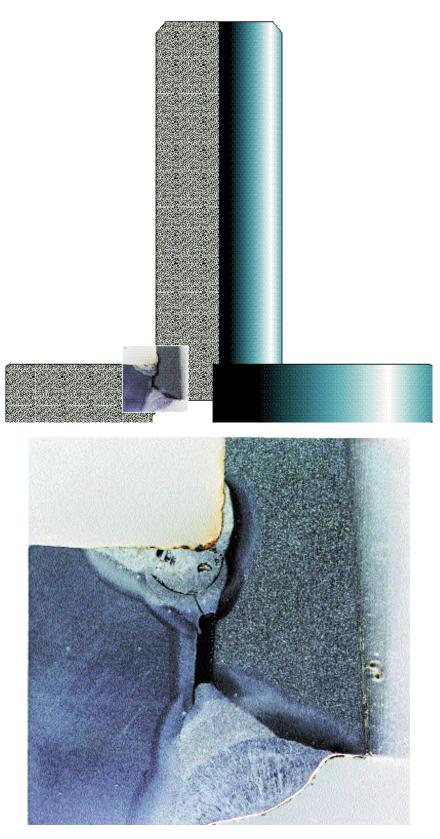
Section through the shore end right stub axle to collar weld with location schematic
